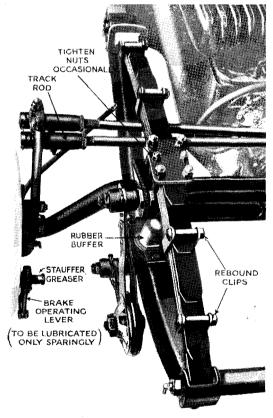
Illustration No. 13.—General view of the steering layout and front wheel track actuating mechanism.
